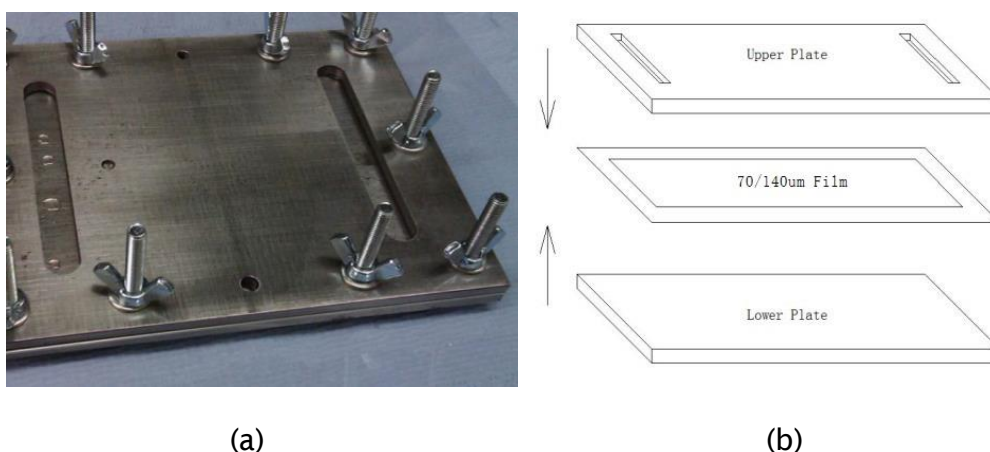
(a) Closed mould (Photograph); (b) Mould diagram showing gasket.
